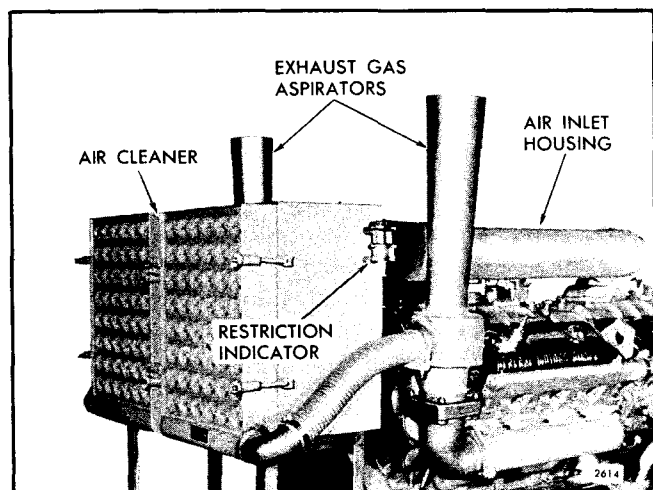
Typical Dry Type Air Cleaner Mounting
